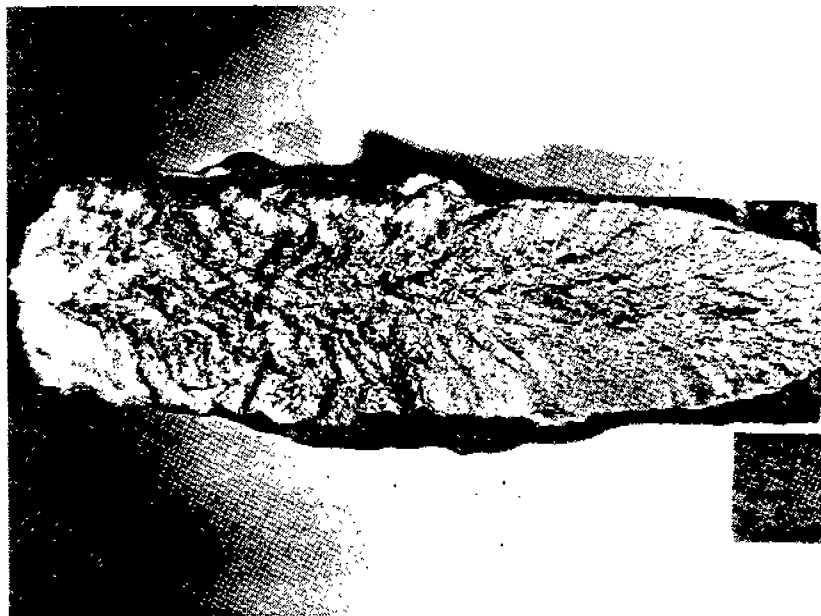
Fracture Face at End of Main Shell Fracture, see Figure 3-38. Note Chevron pattern and apparent "necking down" associated with fracture arrest. Specimen 3908, Magn. 1.2X.
